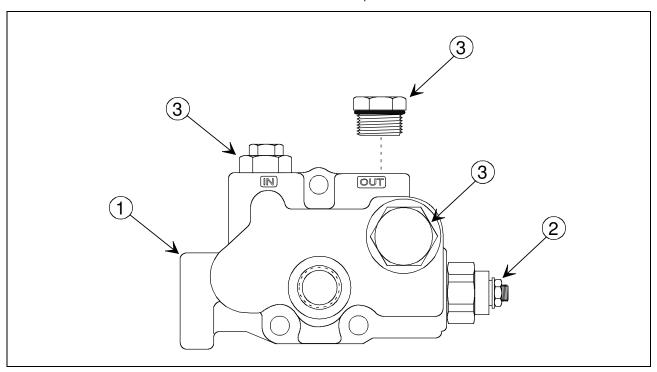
No. 08120xxx Inlet Cover Assembly – Using 08398xxx Inlet Cover Housing
